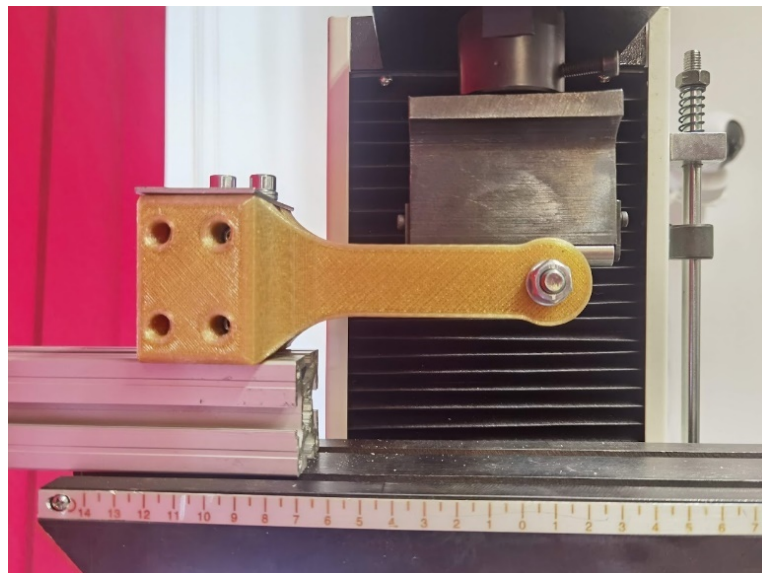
Strength testing setup of a PEKK printed sample using universal testing machine
